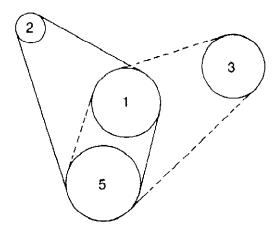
Drive Belt Arrangement: 1983-86 4.2L Cherokee Courtesy of Chrysler Motors
